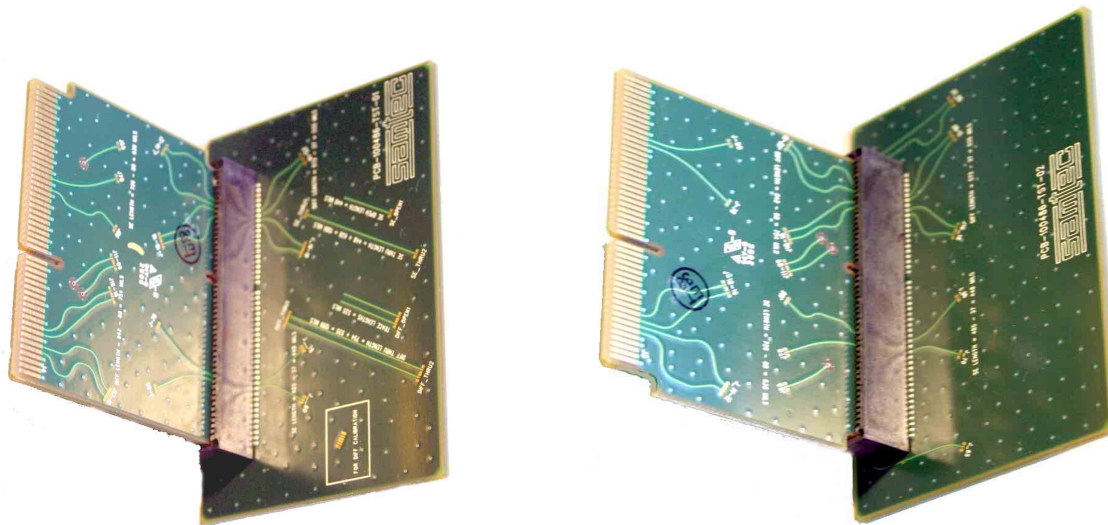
Connector Card Fixtures PCB-100486-TST-01 (Lt.), PCB-100486-TST-02 (Rt.) + EC8 Dual Configuration Signal Launch Card PCB-100486-TST-03
